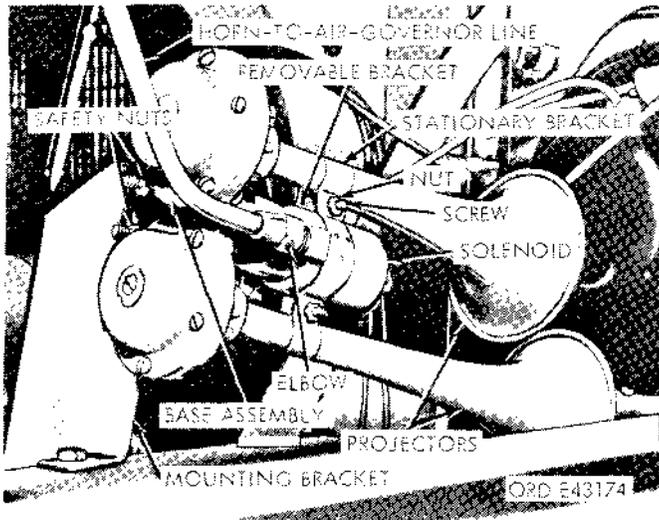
Horn installed on vehicle (solenoid with mounting brackets).
